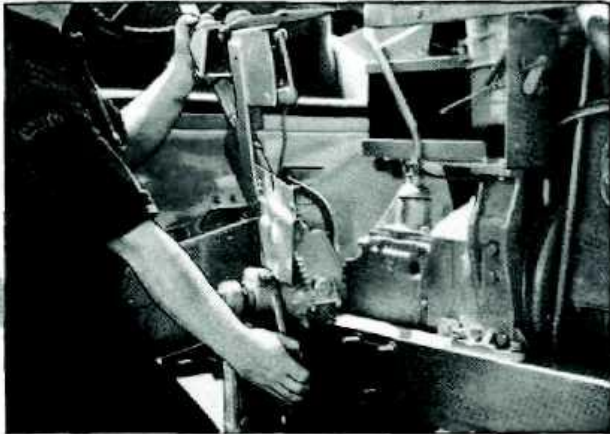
Removing Champion O.S. Footplate, etc.
